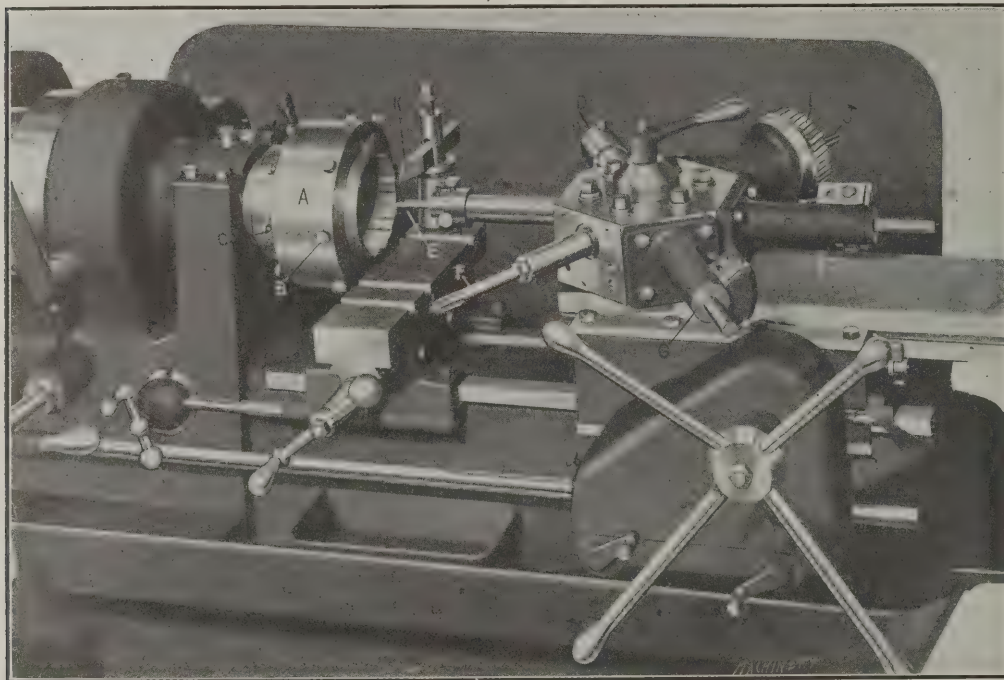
"Set-up" of Tools for Machining a Fan Motor Case in a Turret Lathe built by Bardons & Oliver, Cleveland
